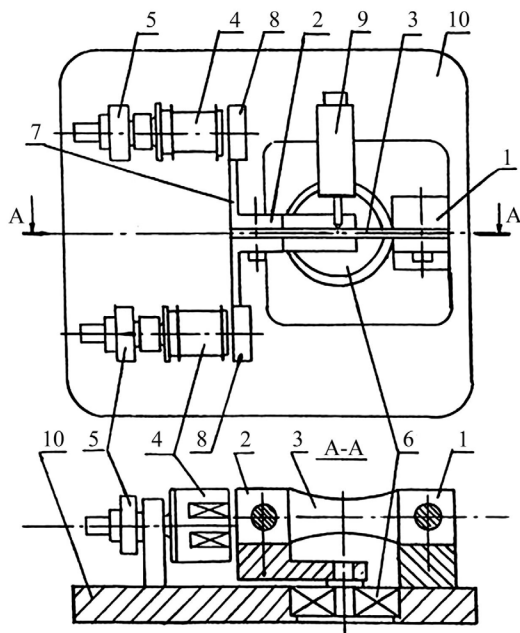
Device for fatigue tests: 1 – fixed catch; 2 – movable catch, 3 – sample, 4 – electromagnet, 5 – screw mechanisms, 6 – bearing unit, 7 – transverse beam, 8 – anchors, 9 – transverse beam, 10 – base plate
